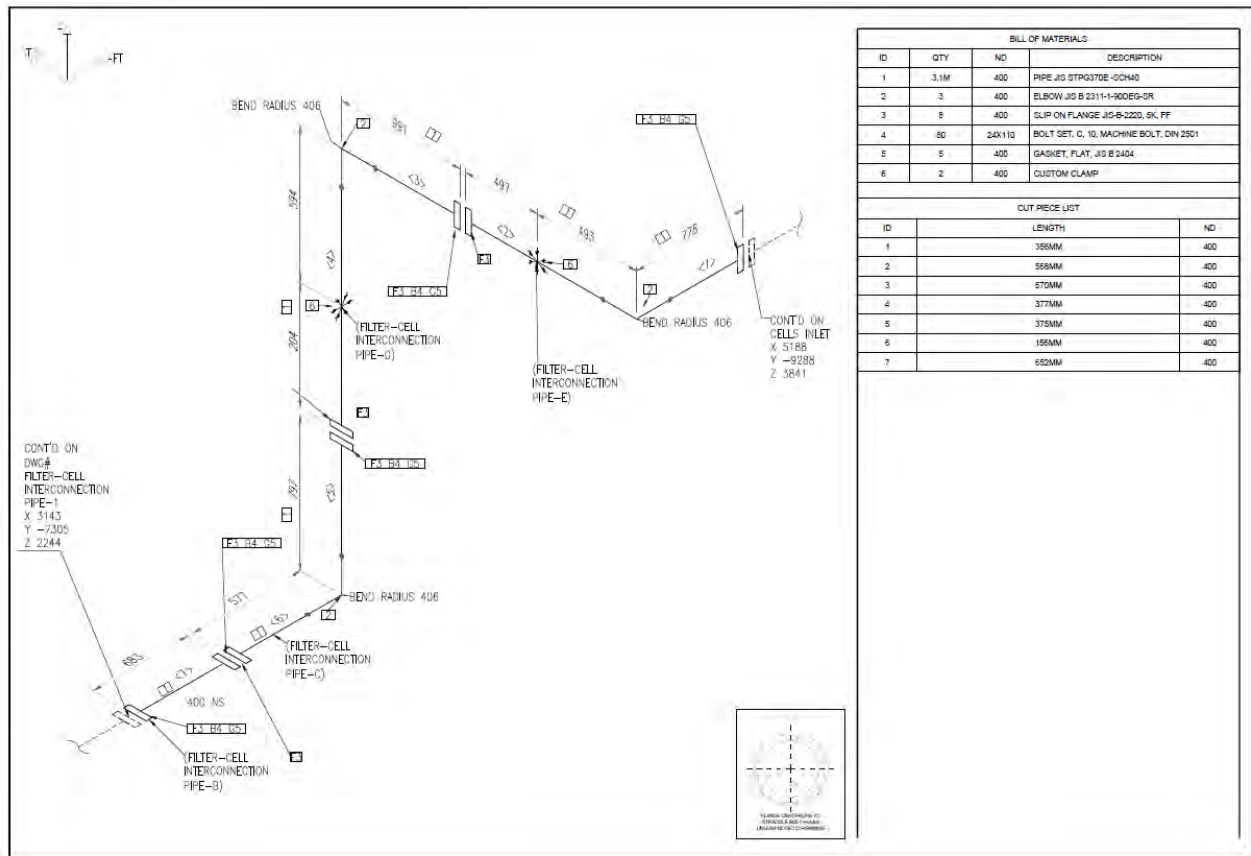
Piping isometric drawing for prefabrication, for a BWTS installation. Source: Author
